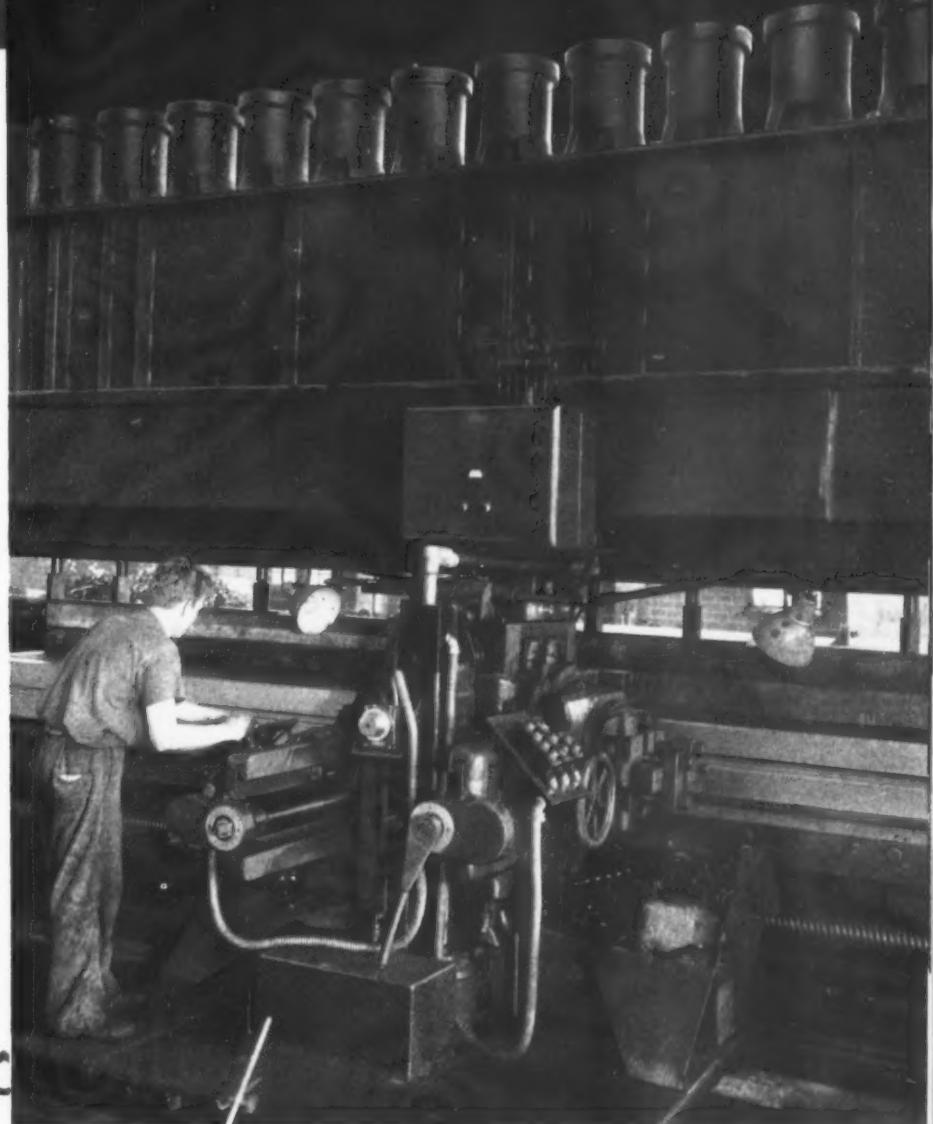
(Right) The Double Carriage on Another Type of Plate Planer, Used in Machining One End of the Armor-plate Sections that Cannot be Accommodated by the Machine Seen in Fig. 1
